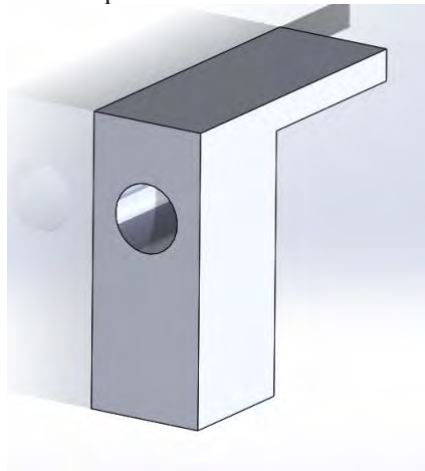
CAD model of mounting piece for bearings and linear actuator.
